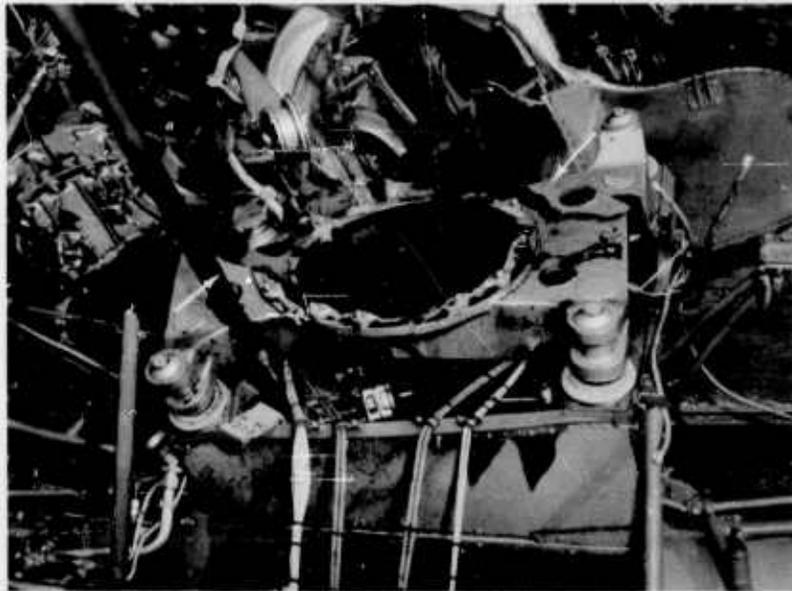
Transmission torn free from its cradle support. Note the fractures in the magnesium casting (arrows).
